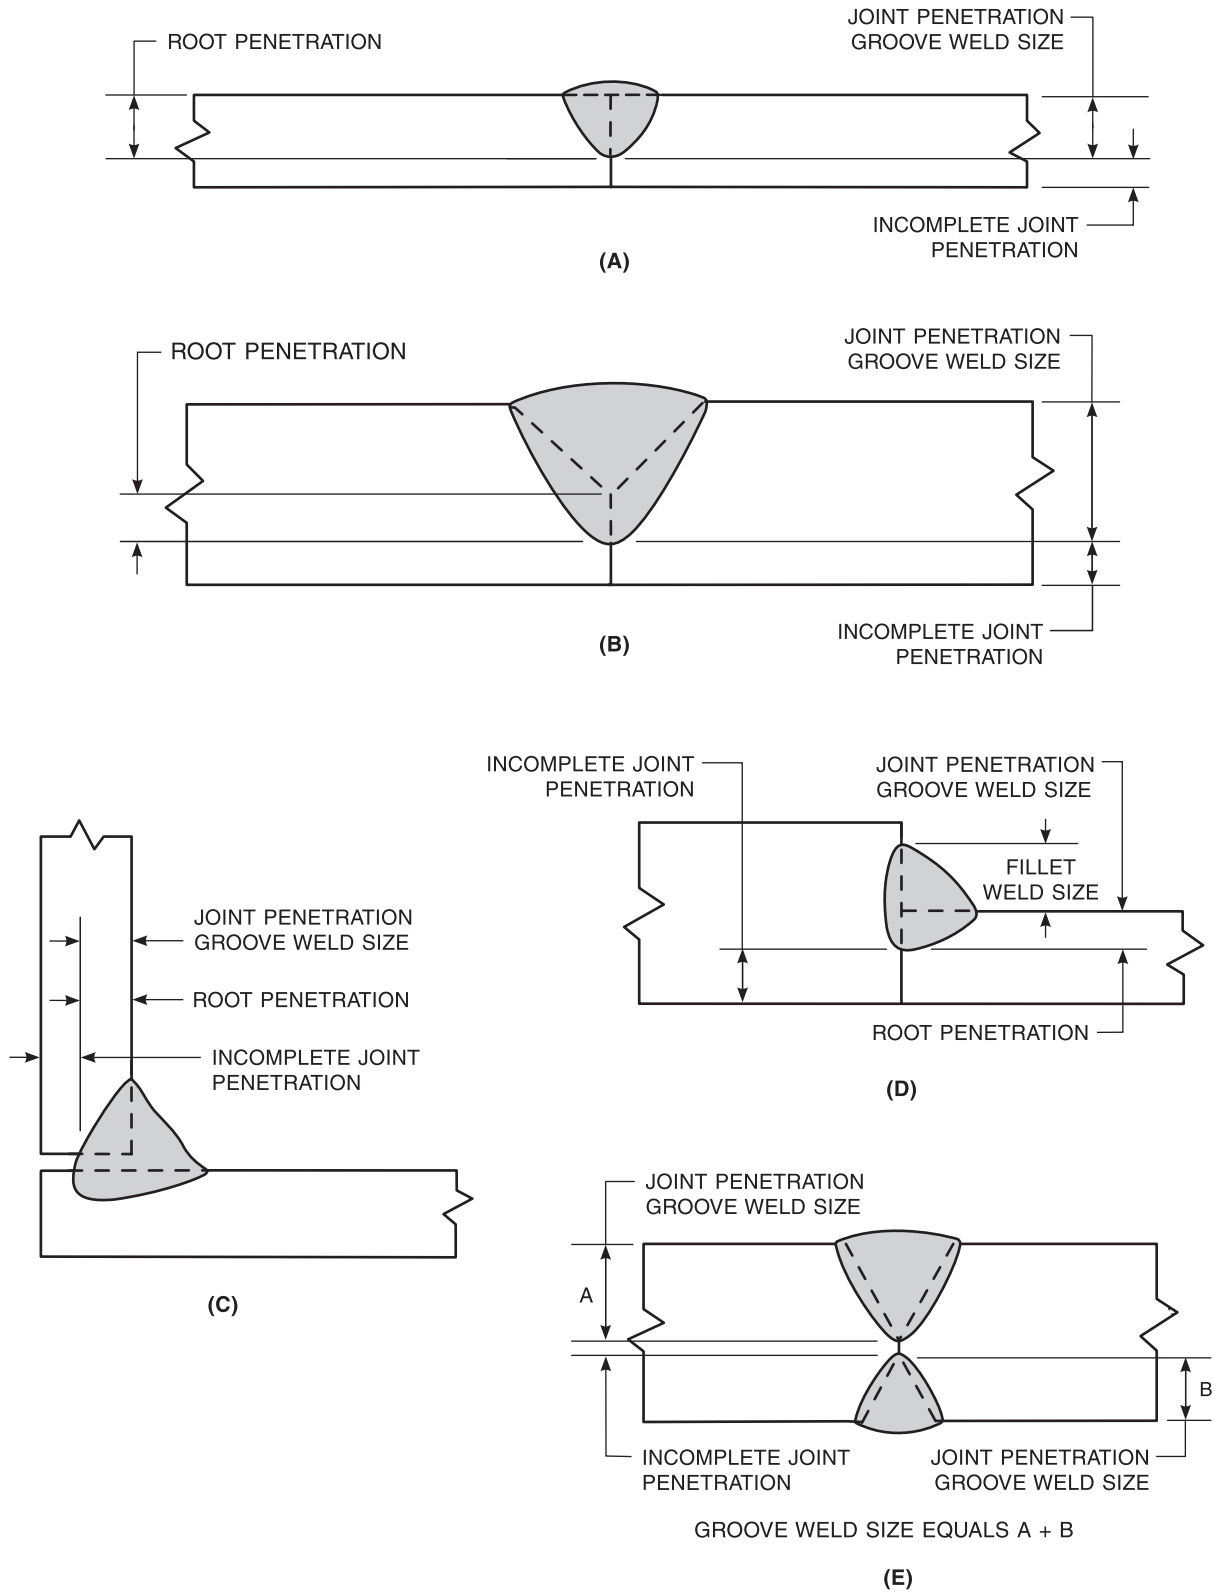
Groove Weld Size and Joint Penetration
